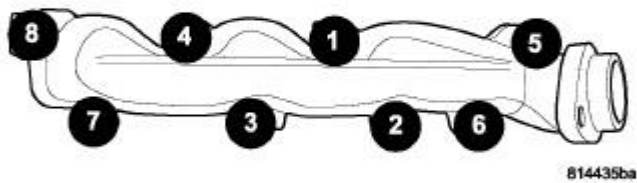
Exhaust Manifold Bolt Tightening Sequence - Left
